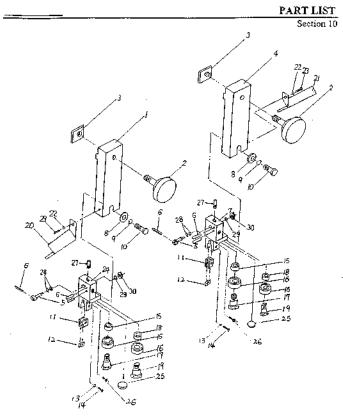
BLAS GUIDE ARMS ASSEMBLY
